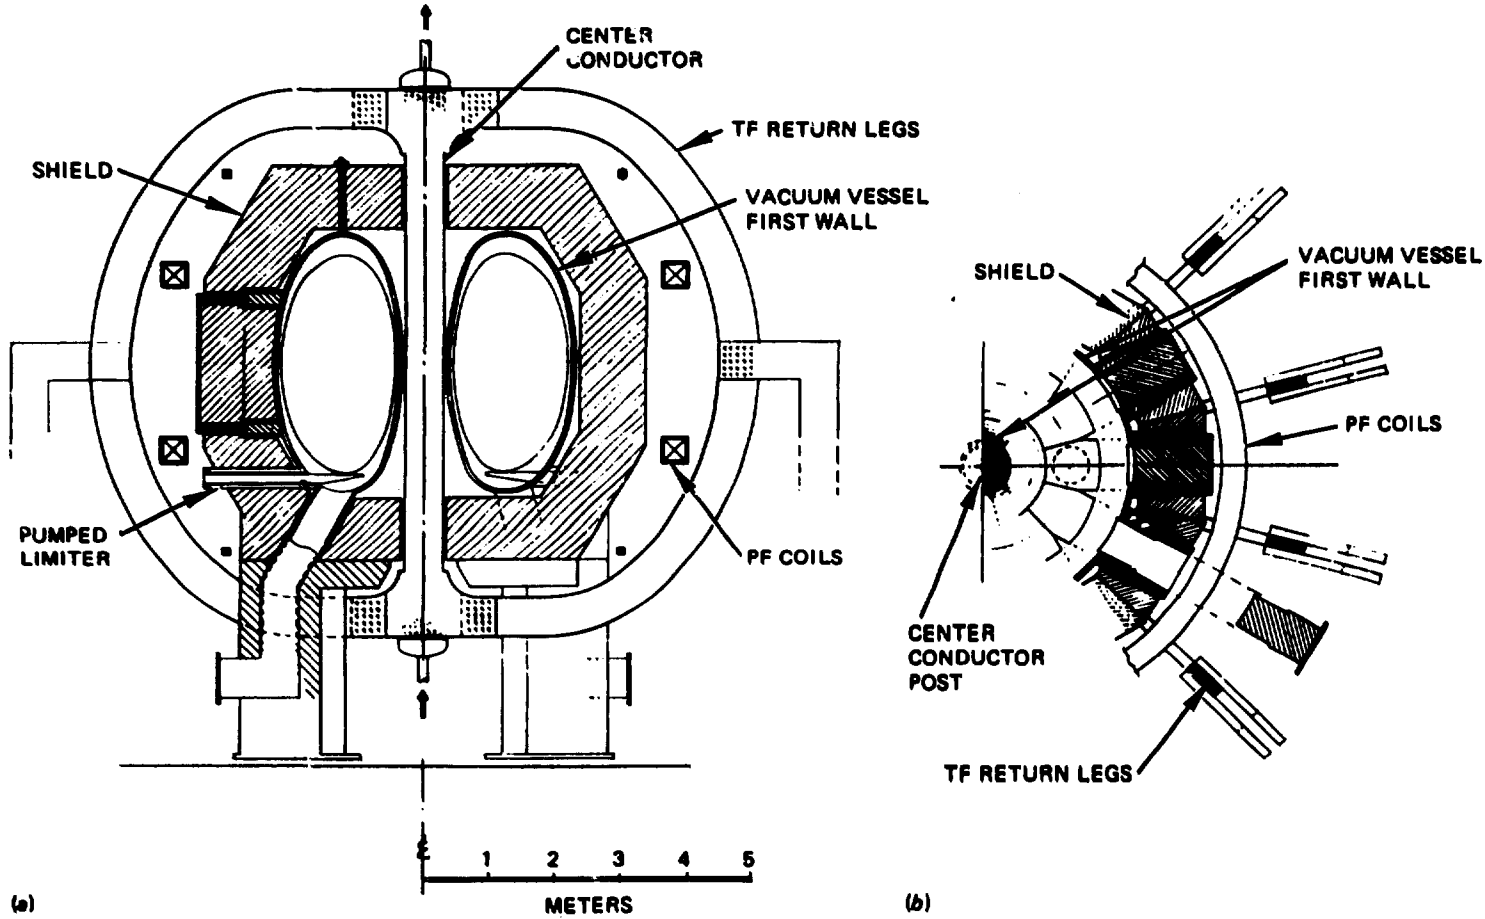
(a) Elevation and (b) plan views of the conventional configuration.
